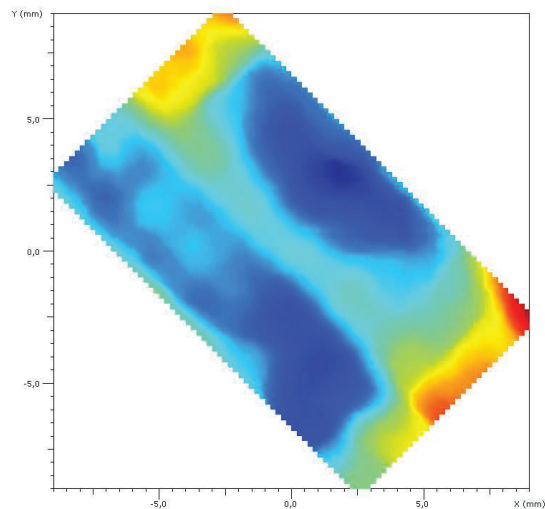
Measurement with the optical sensor of a cylinder lens rotated by 45°.
